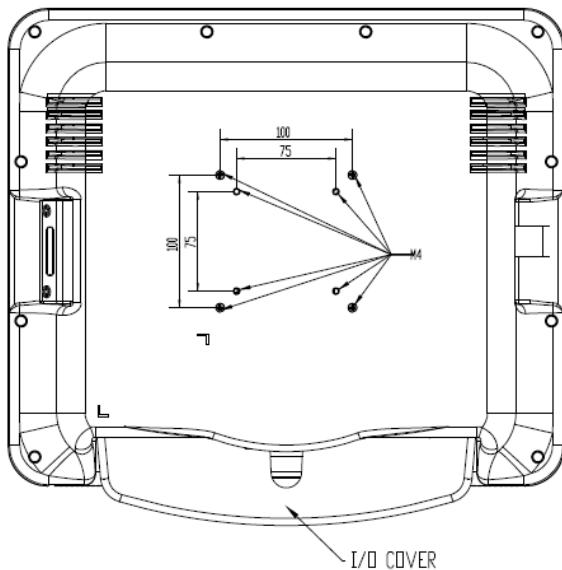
VESA mounting dimension diagram (75 x 75 mm, 100 x 100 mm)
